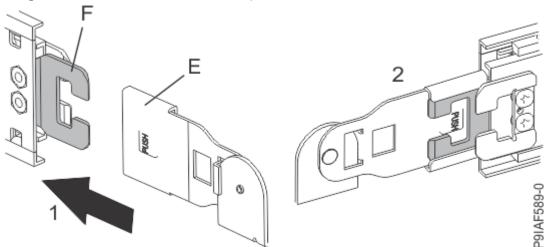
Attaching the extension tab to the cable management arm to the outer cable management arm tab
